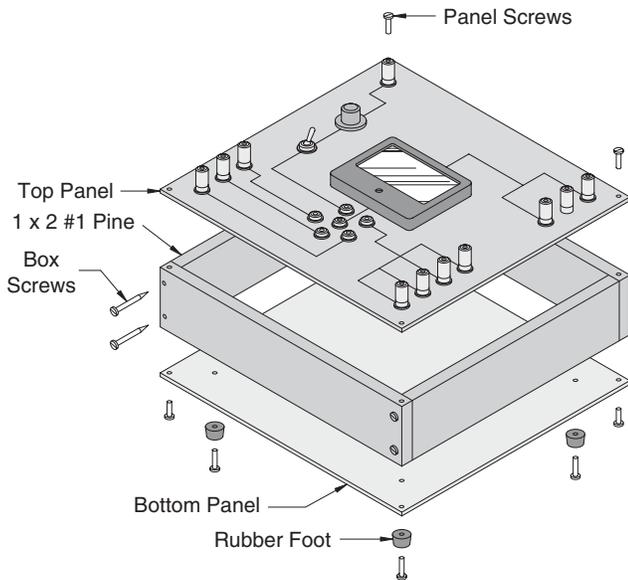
Bench Built Multimeter Cabinet Assembly
